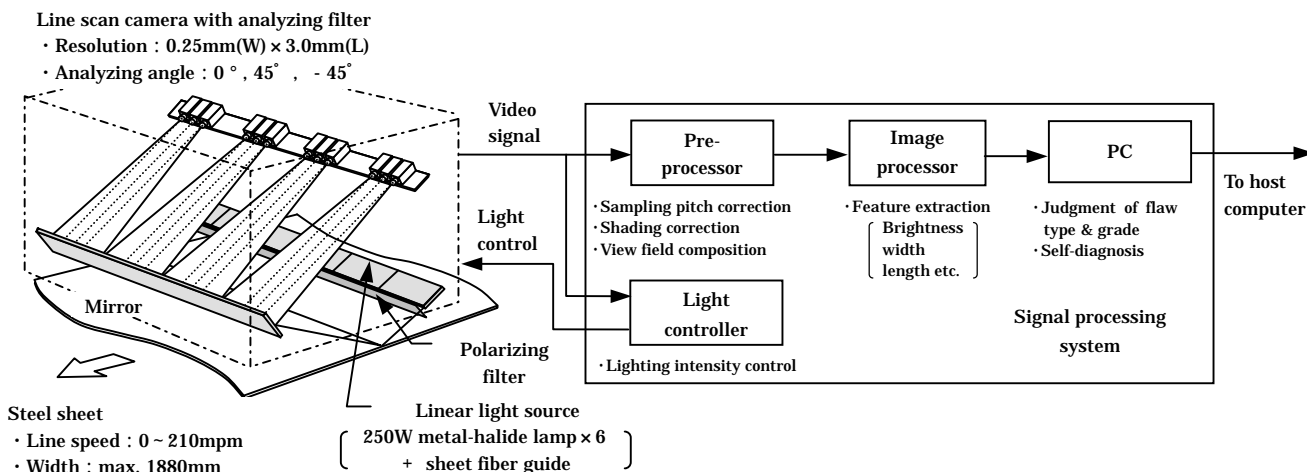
Schematic diagram of the surface flaw inspection system
